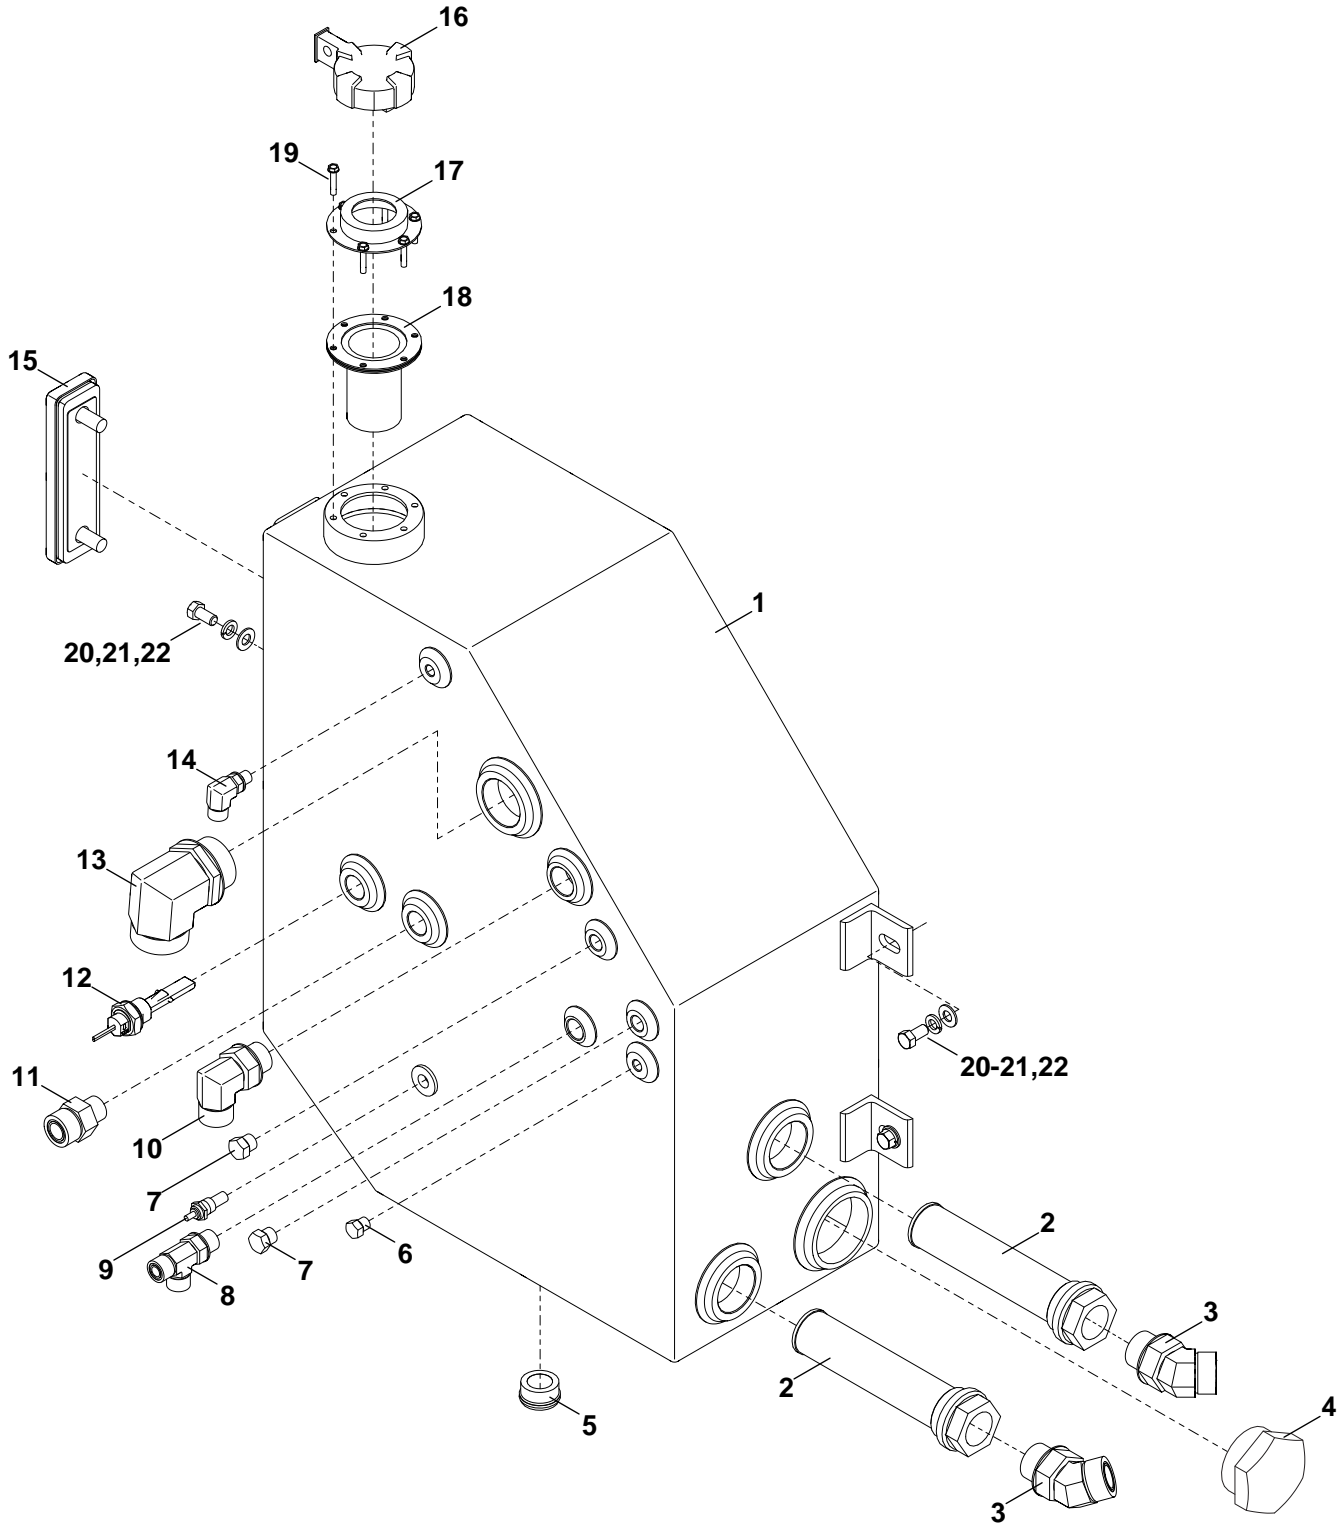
Upper Hydraulic Tank Assembly - Propane Screed Heat
